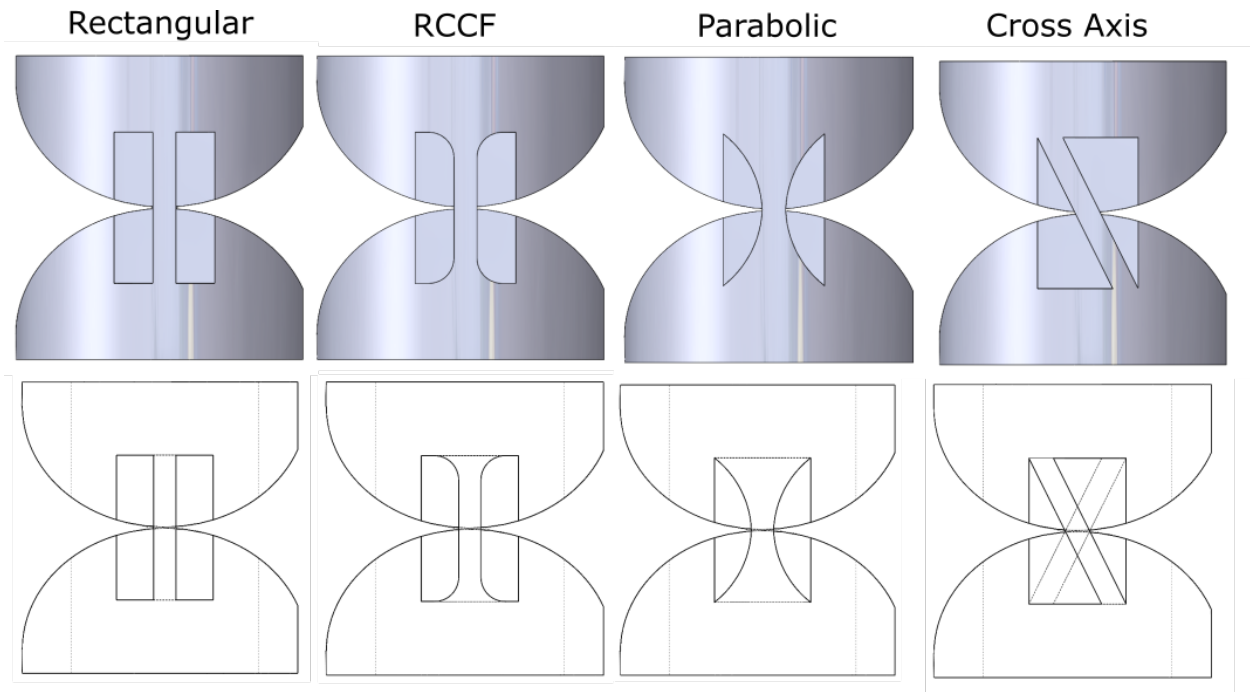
Four different compliant flexure designs integrated between the segments. A rectangular, right-circular corner-filletted (RCCF), Parabolic and Cross axis joint.
